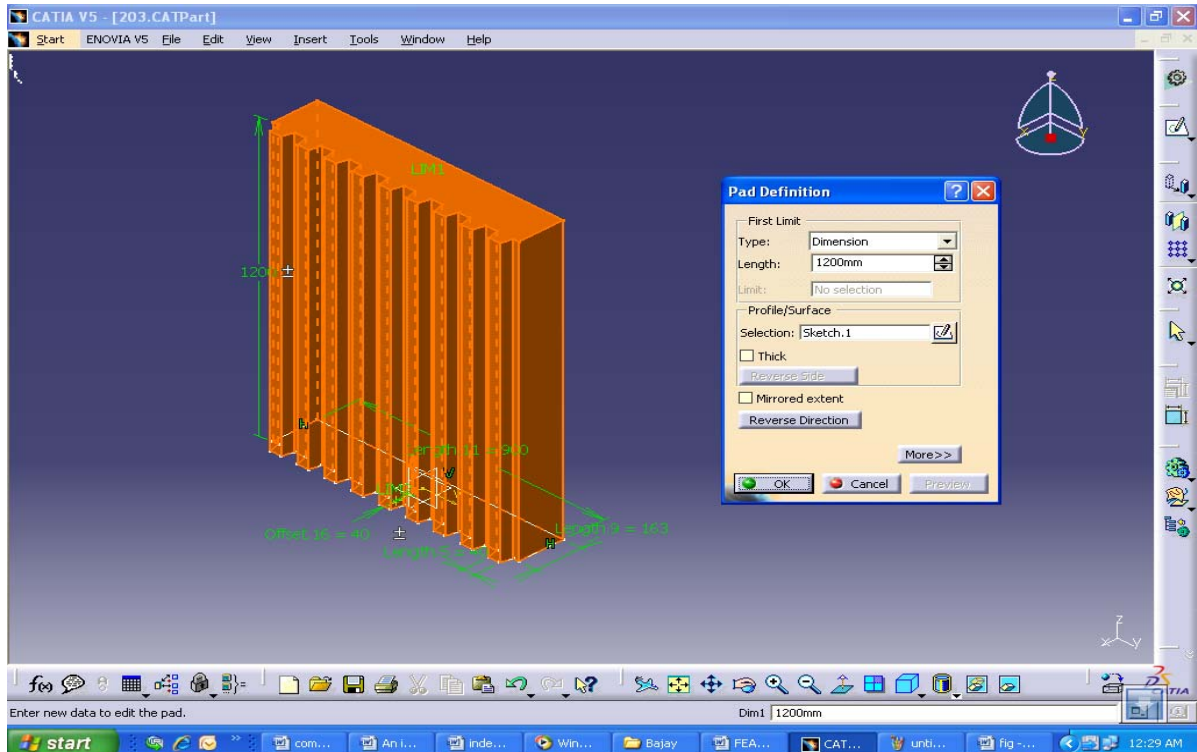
Extruding Sketch of Swing Jaw Plates Using Pad Tool
